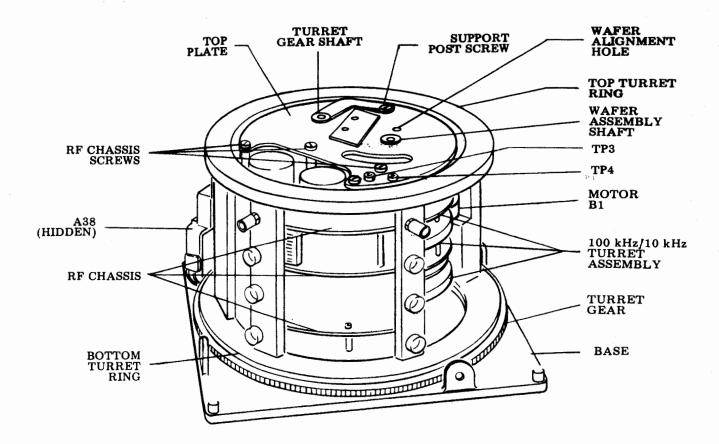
RF Amplifier Assembly A2A4, Disassembly Parts Identification
